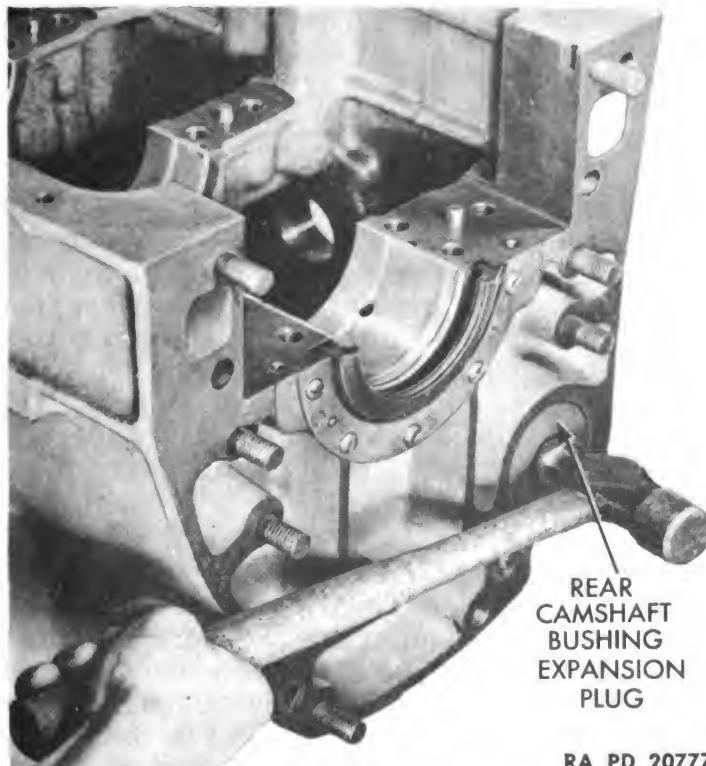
Installing Rear Camshaft Bushing Expansion Plug
